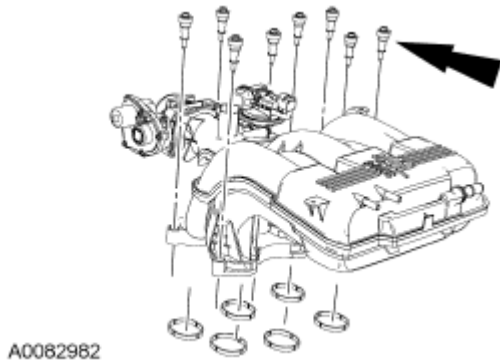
Locating Gaskets, Intake Manifold And Bolts
